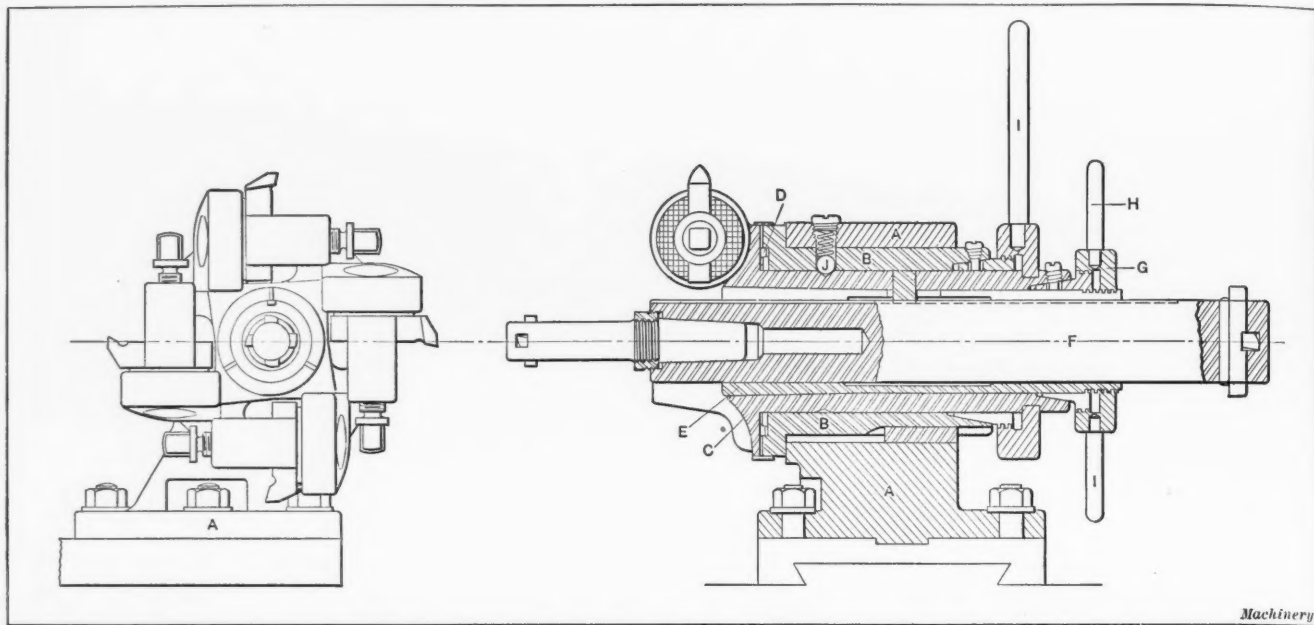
End and Cross-sectional Views of the Conradson Turret Toolpost
